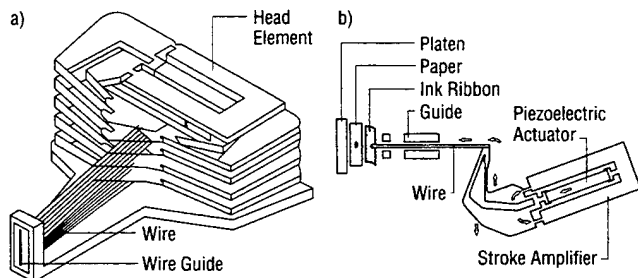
Structure of a printer head (a), and a differential-type piezoelectric printer-head element (b) (NEC).
